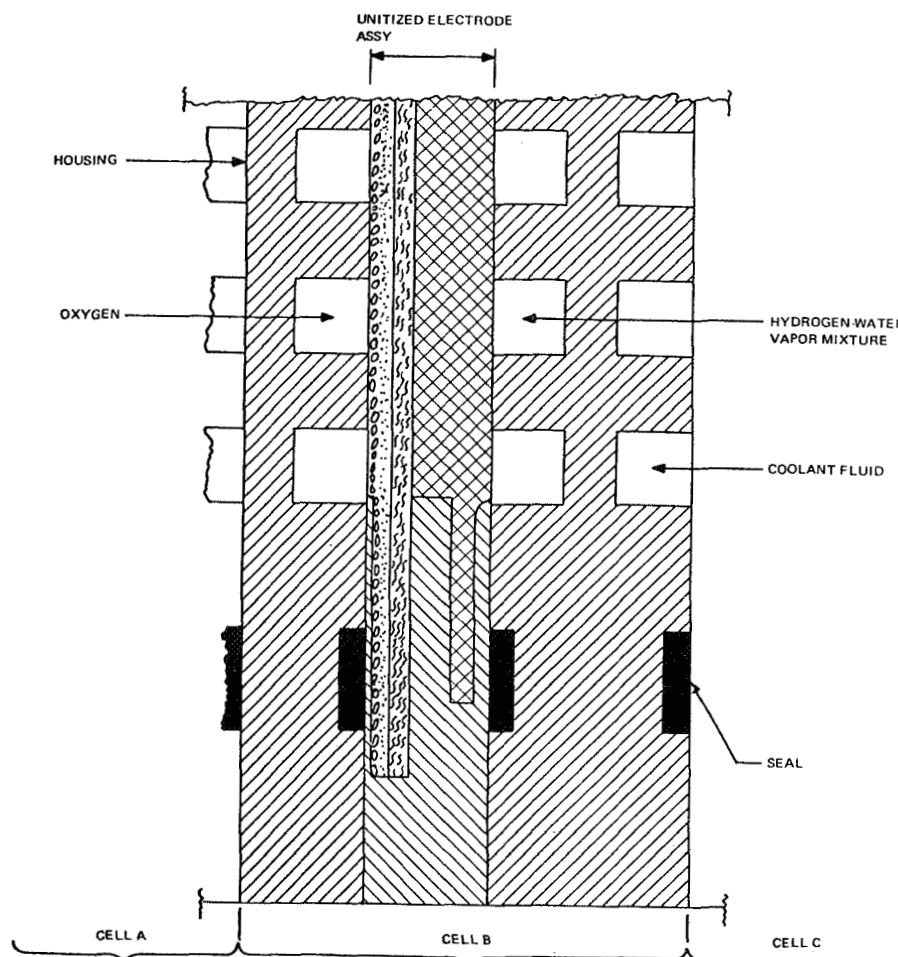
Pratt & Whitney Aircraft Matrix Cell Assembly
